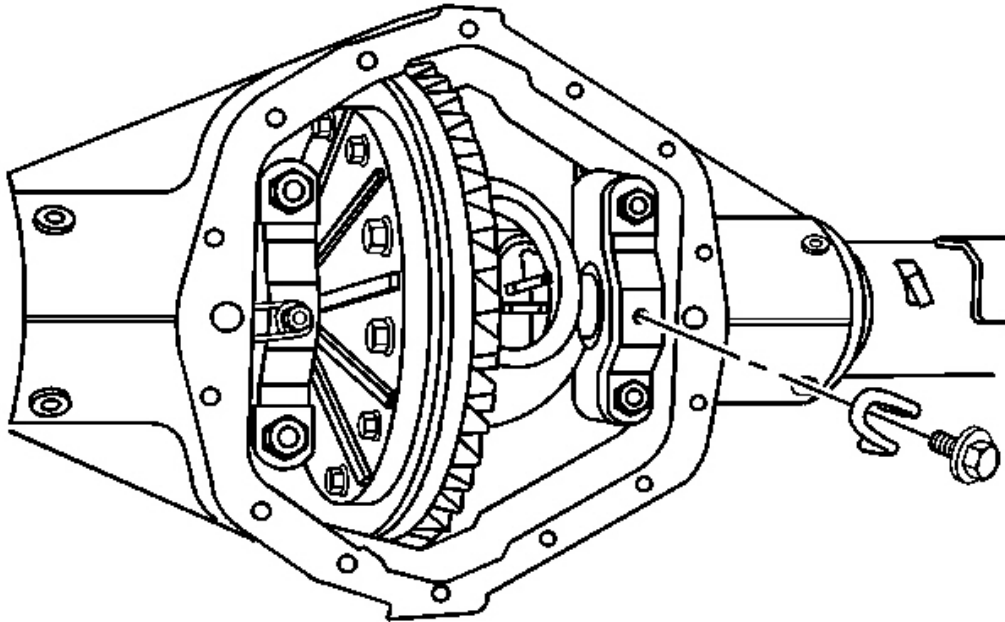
Right Side Differential Bearing Adjuster Nut Lock
